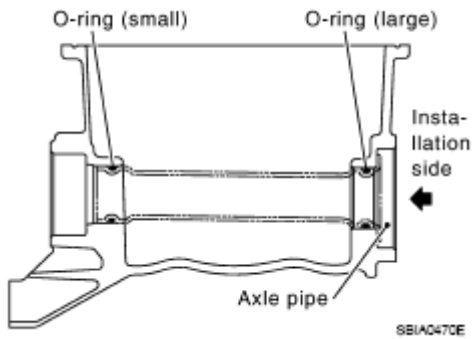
Identifying O-Ring Groove Of Axle Pipe
